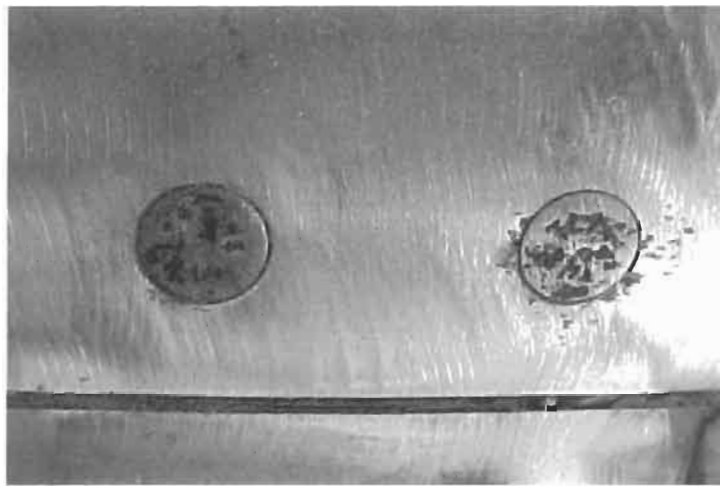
Wing surface after removal of most of the corrosion, note panel joint and taper lock fasteners.
